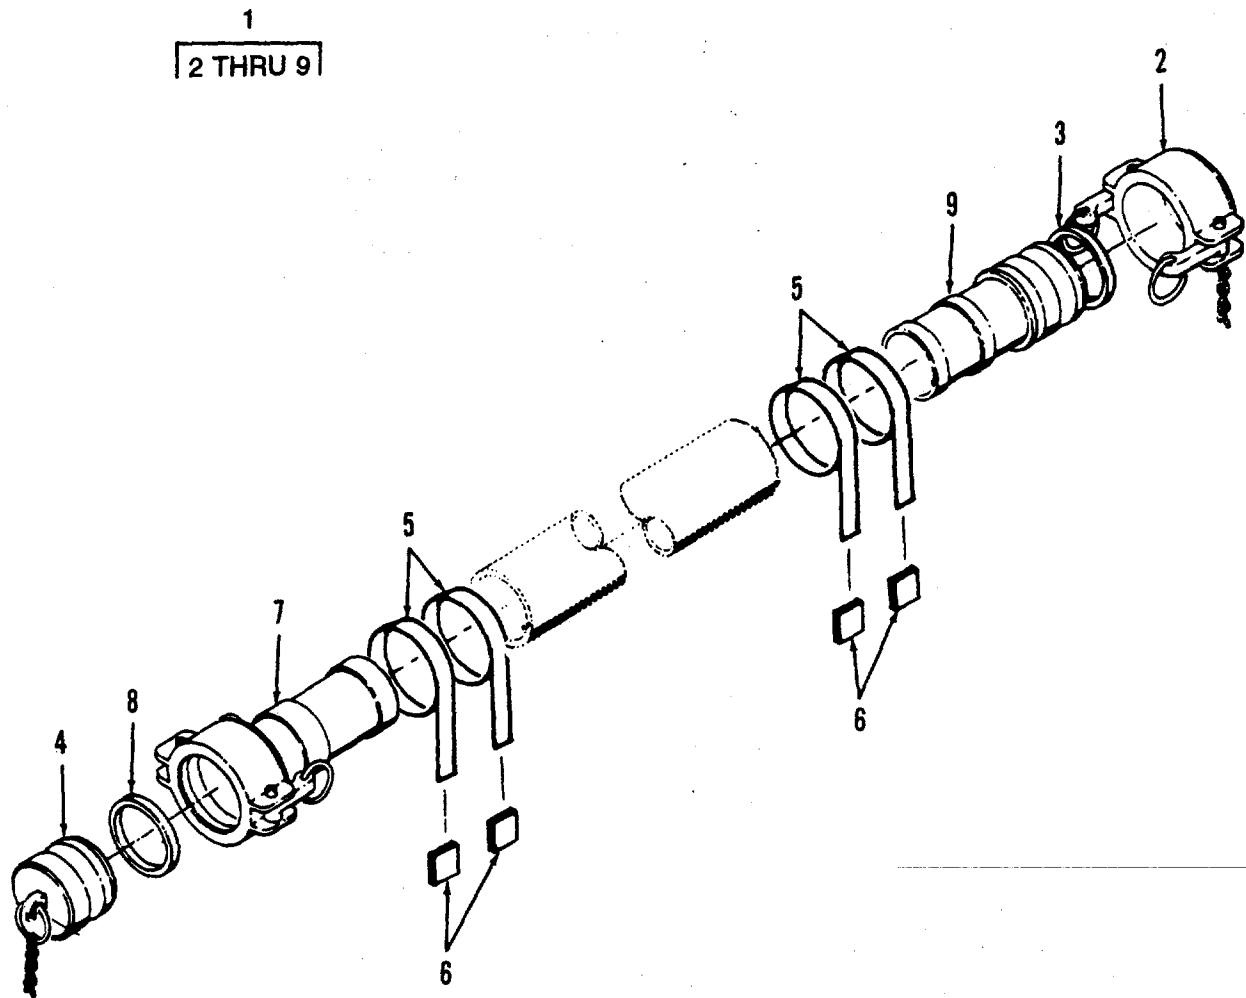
Hose Assembly, Discharge, 1.50 in. x 25 ft.
